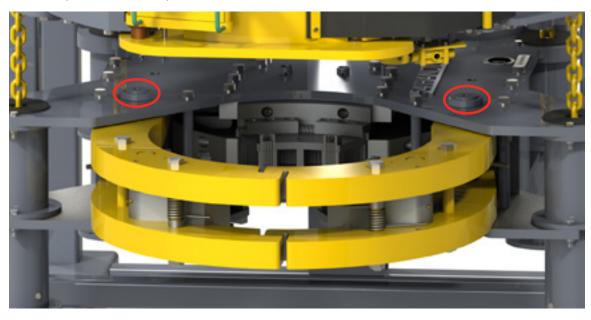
Lockjaw Backup Door Pivot Shaft Lubrication
